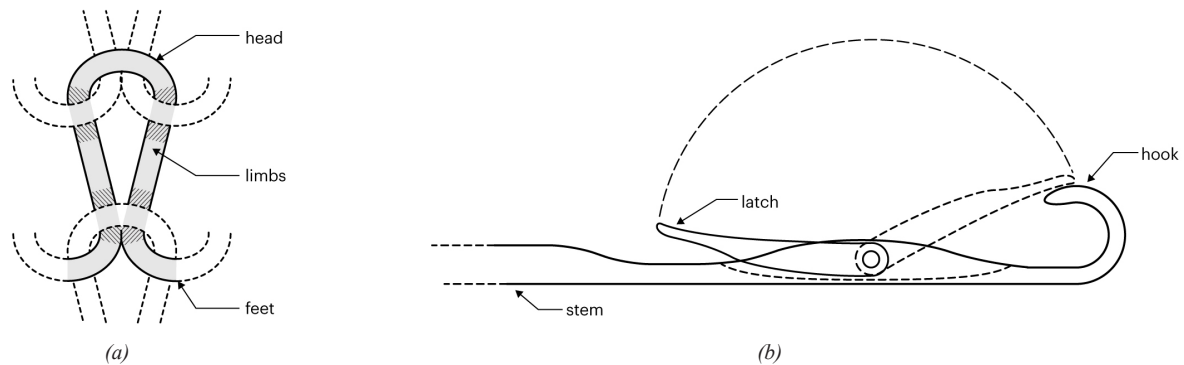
(a) The simplest unit of a knit structure is a stitch (b) Self-acting latched needle commonly used in knitting machine
